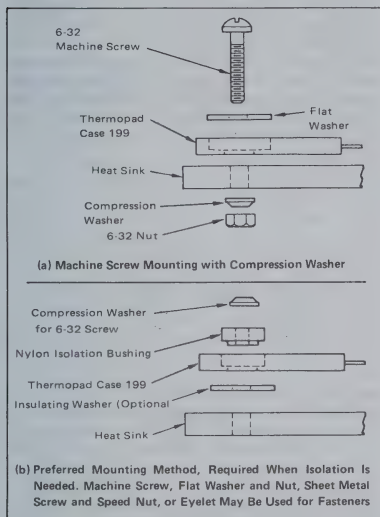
Recommended Mounting Arrangements for TO-126 and TO-127 Thermopad Packages
